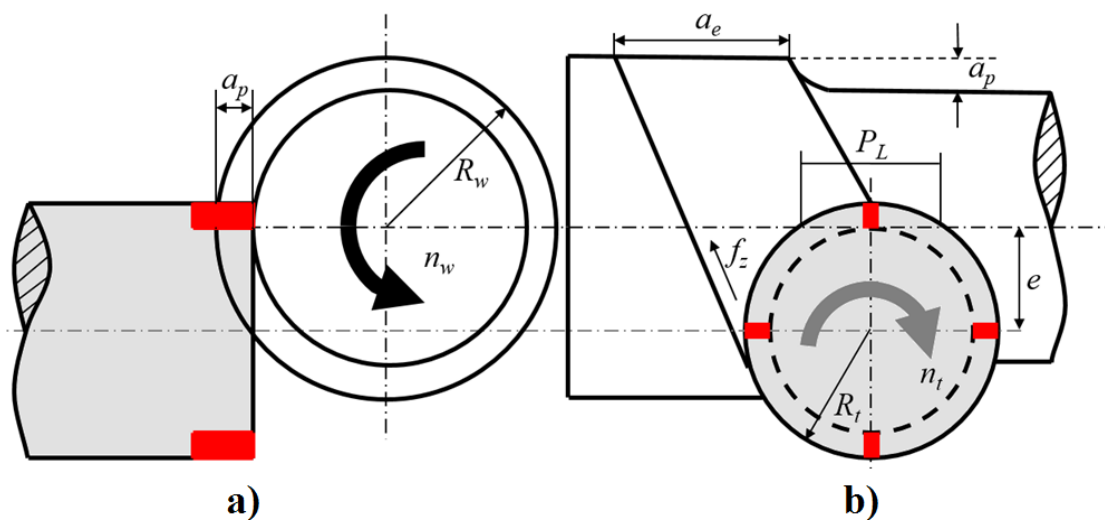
Process geometry in turn-milling a) Side view, b) Top view
